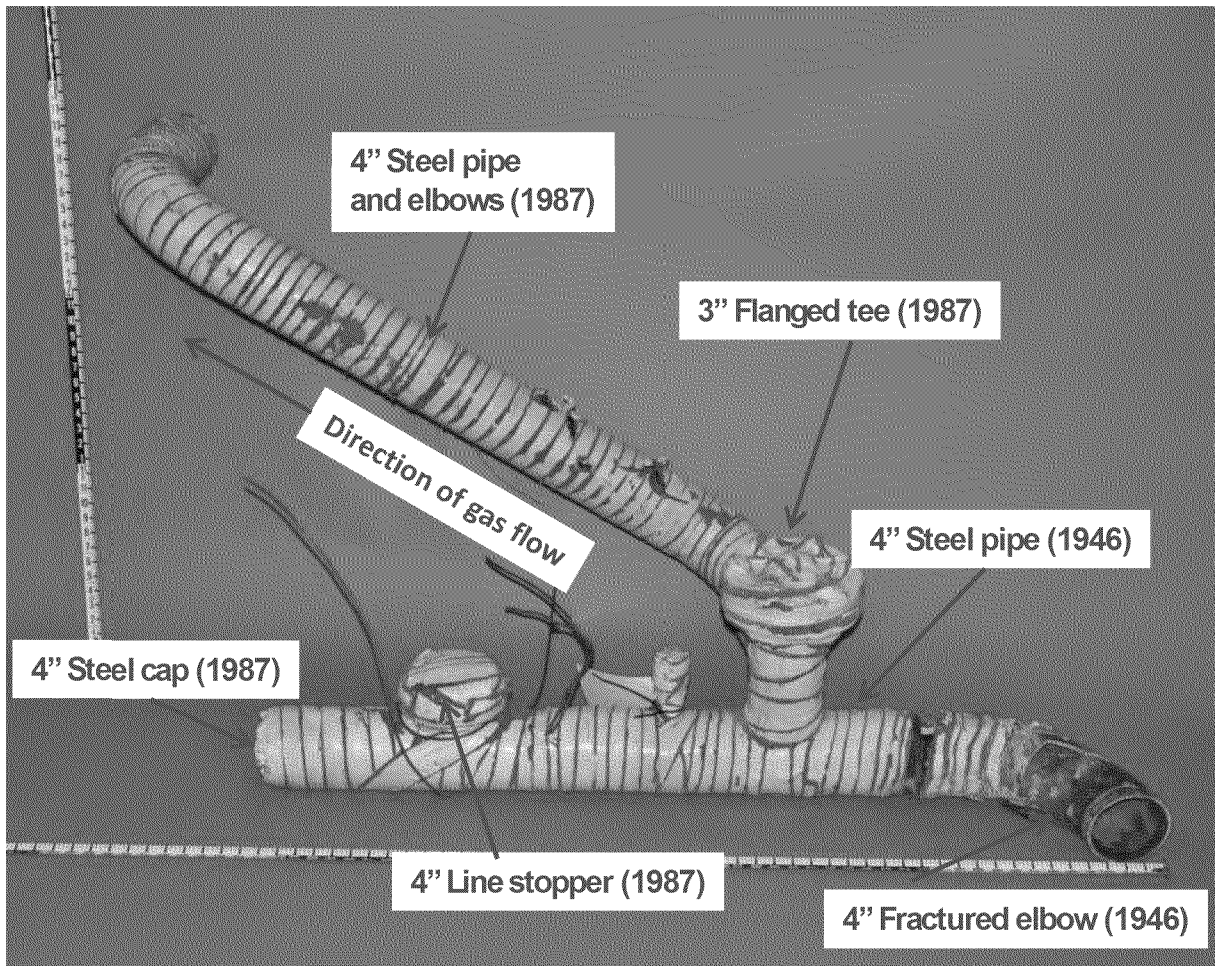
Fractured elbow and adjacent features after removal, with piping photographed as if viewer is looking downstream.
